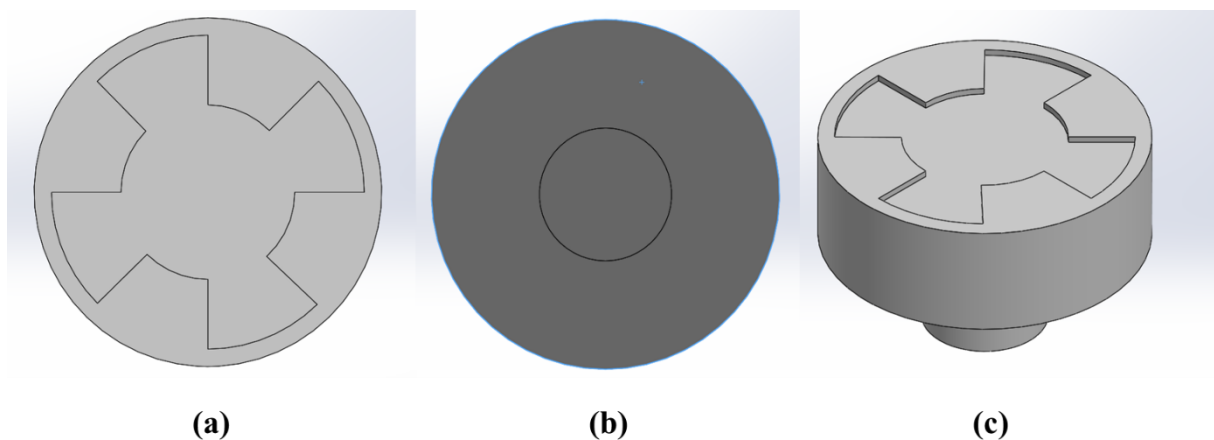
(a) Front Side of the Bearing Stator Pad (b) Back Side of the Stator Pad
